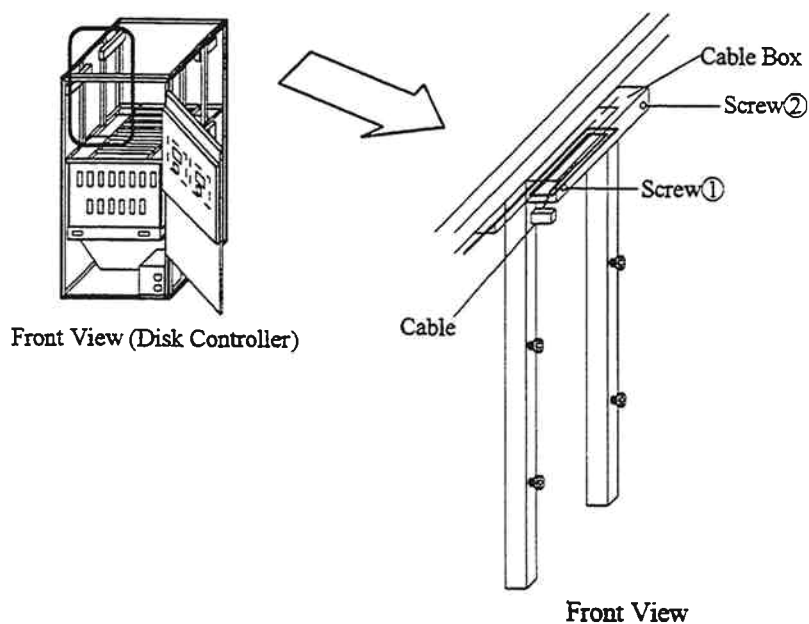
Removal of the Cable Box
